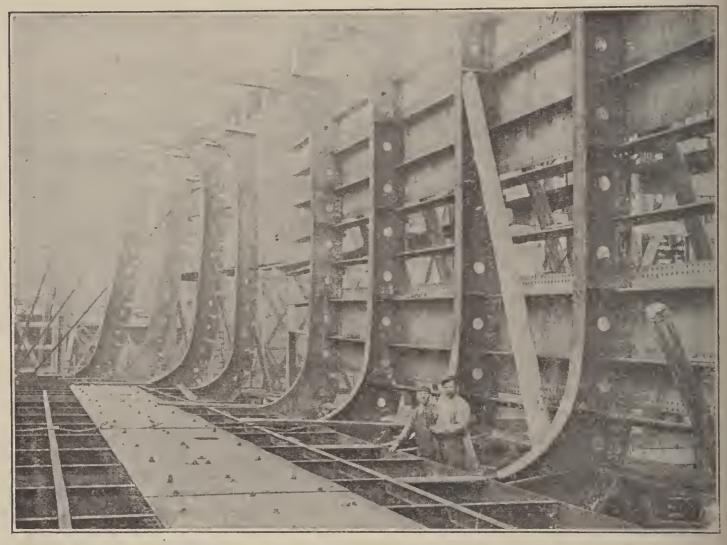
Vessel of 5,060 tons being built on the Isherwood system at the Schelde Works.
